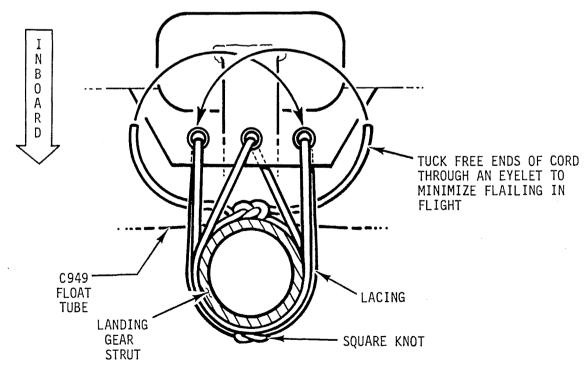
UTILITY FLOAT-TO-STRUT ATTACHMENT (VIEW LOOKING DOWN)
